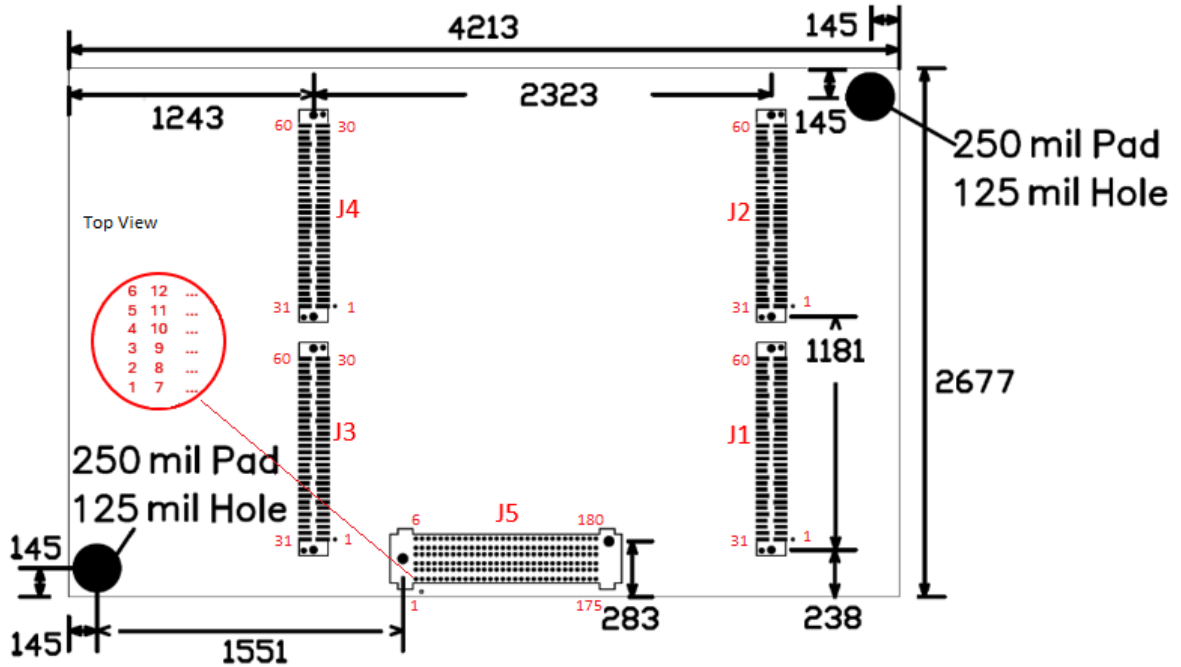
SV3D load board footprint placement. Measurements are in mil.
